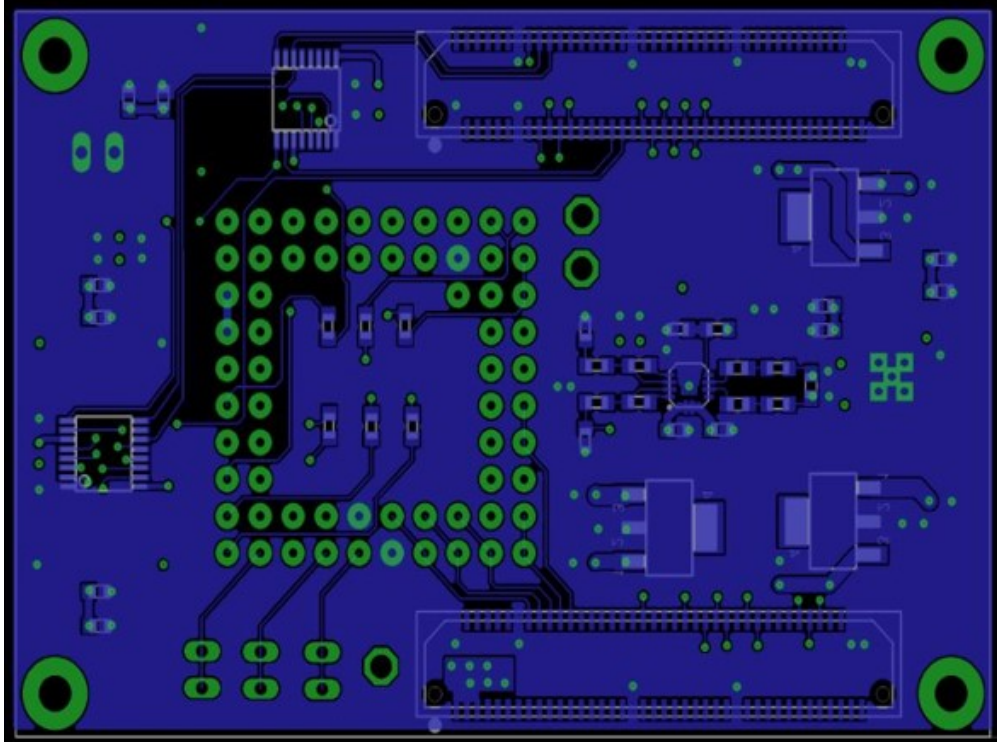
Bottom view of PWB that is used for testing of the IC.
